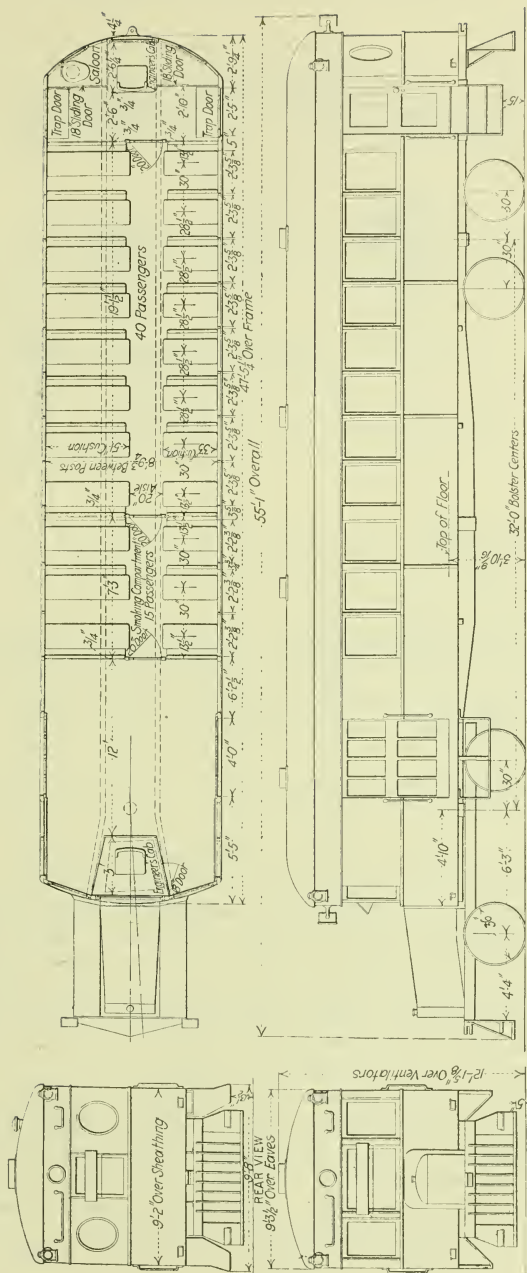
PLAN VIEW OF A 55-PASSENGER MOTOR RAILCOACH
